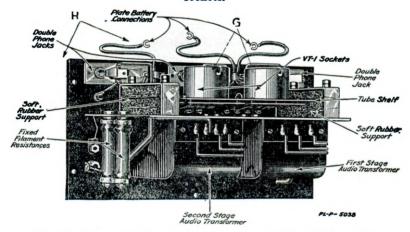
Panel of set box BC-17 removed to show interior parts.
